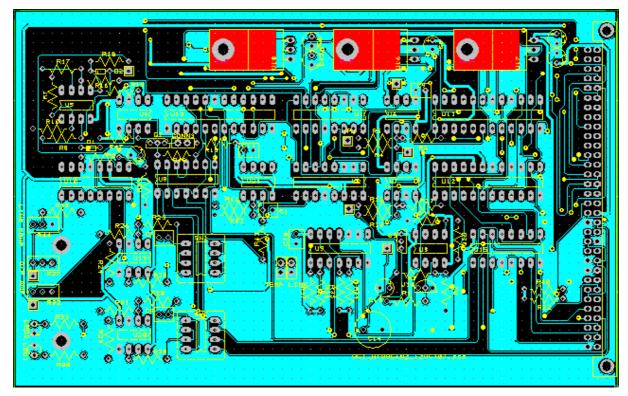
Double-sided printed circuit board layouts of the analogue board.
